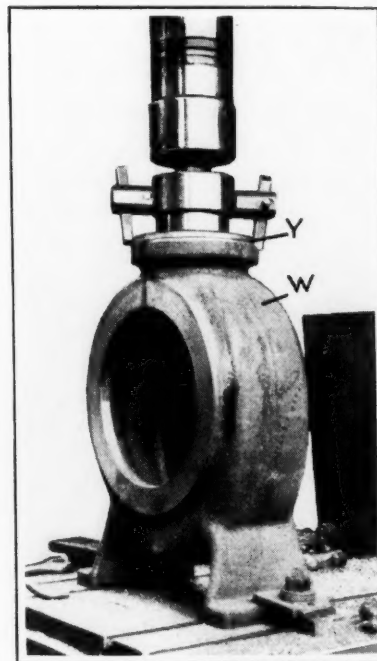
Set-up for Rough- and Finish-turning Crankcase Neck
